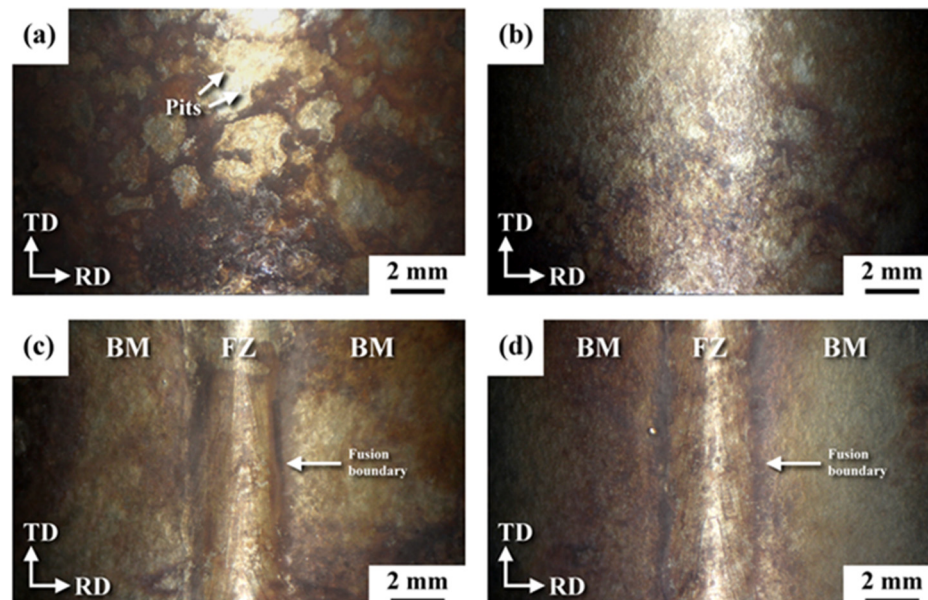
The macro-surface appearance of the U-bend samples for the (a) 304R, (b) 316R, (c) 304RW and (d) 316RW samples after salt spray.
